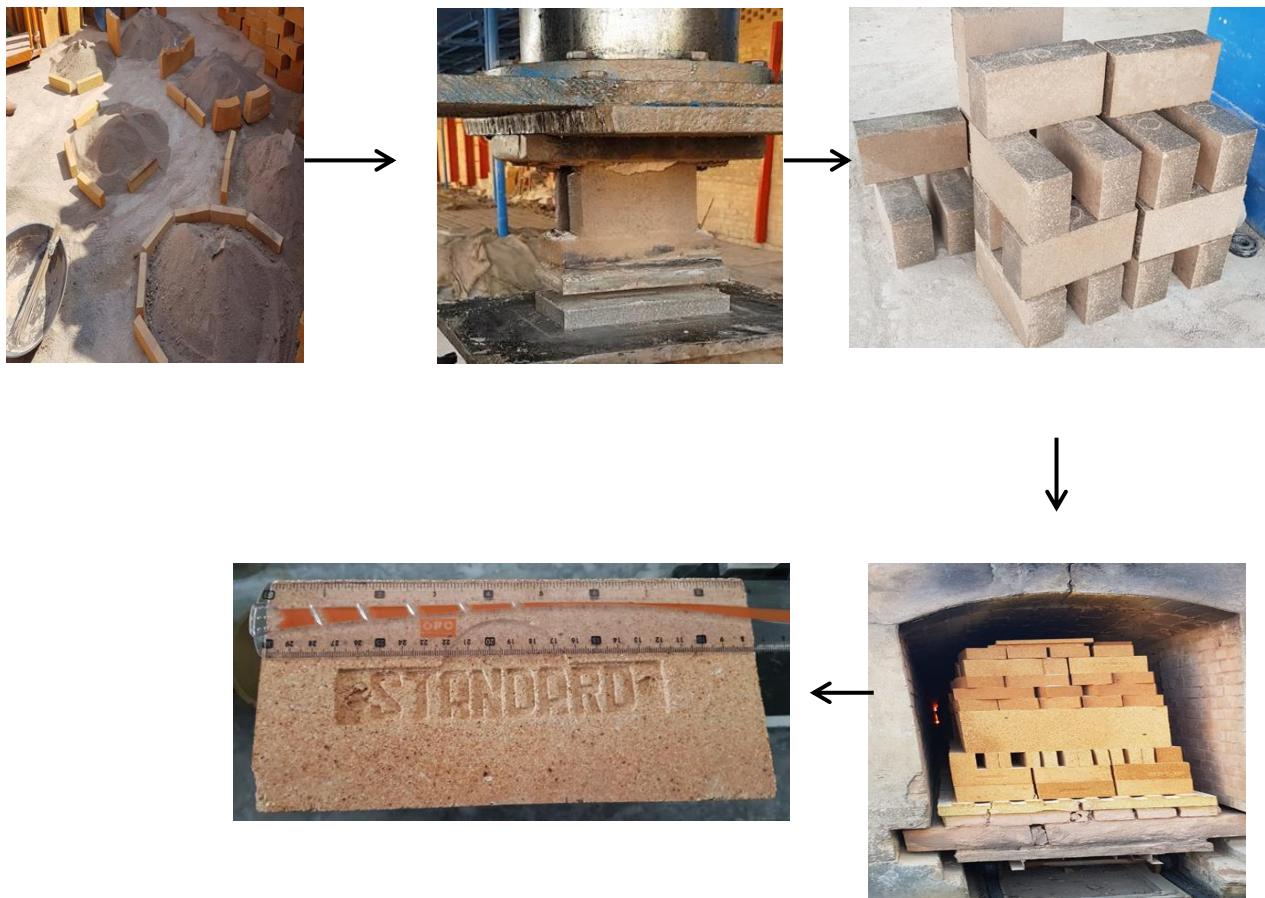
Process of brick making from mixing, pressing, drying, firing and final brick
